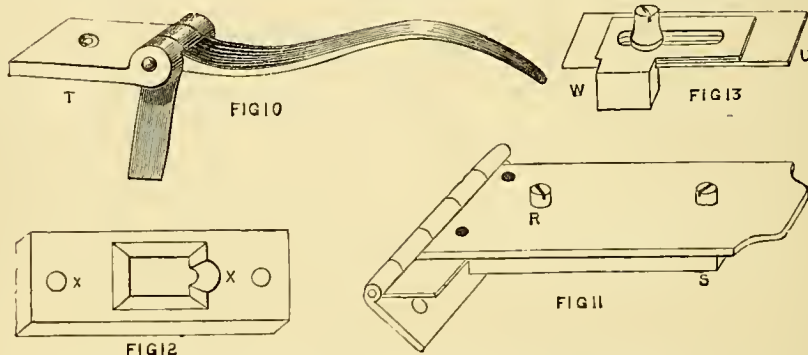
SLIDE LEVER FOR TYPE CASTING MACHINE. FIG. 11.—PLATE FORMING MATRIX FLAP. FIG. 12.—DIAGRAM SHOWING HOW SCREWS SHOULD BE PLACED IN BLOCK OR FLAP. FIG. 13.—GAUGE FOR MAKING LETTERS OF PROPER THICKNESS.
